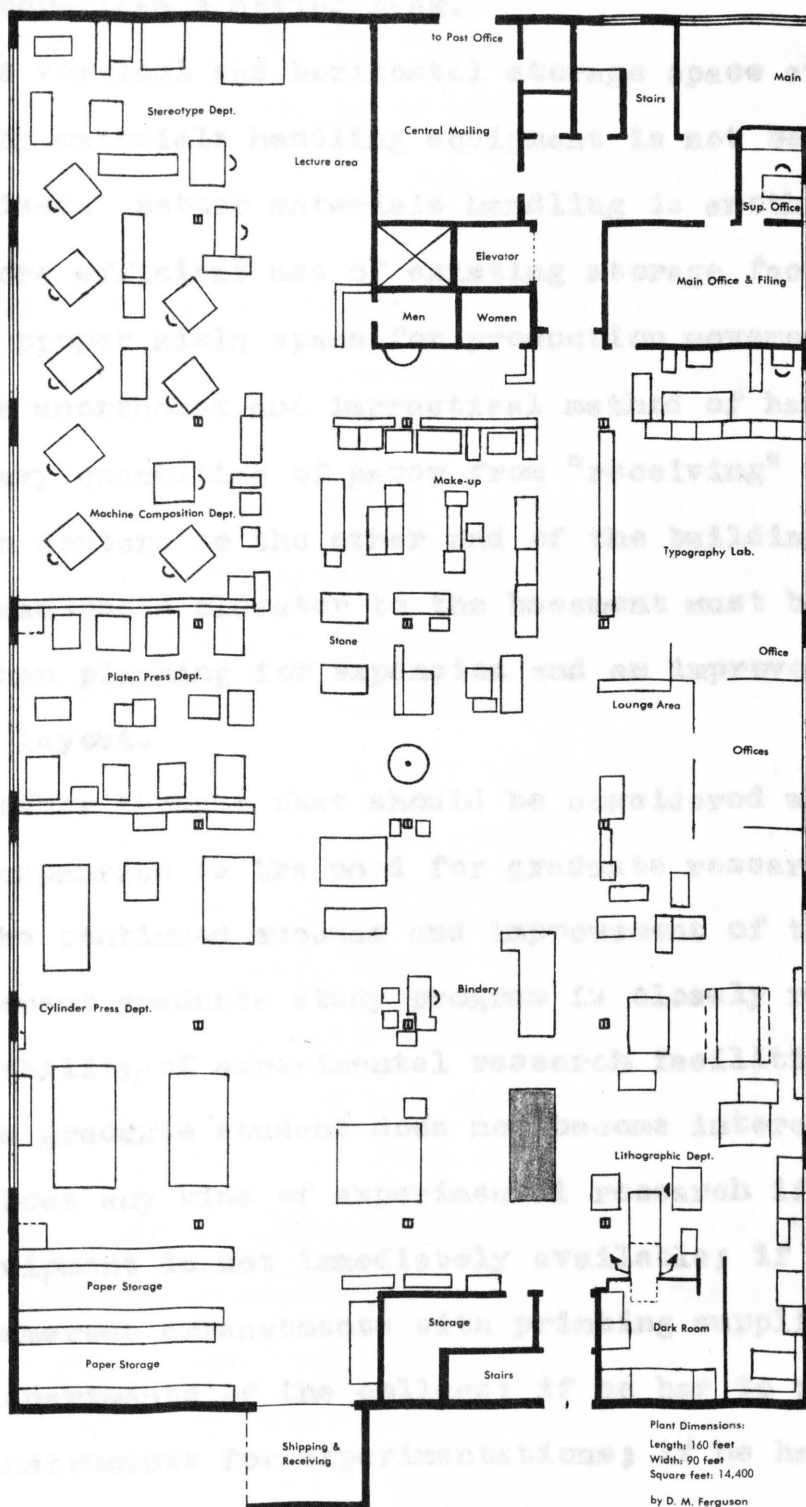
Printing plant layout with violet color indicating the size and position of cylinder press recommended for removal
